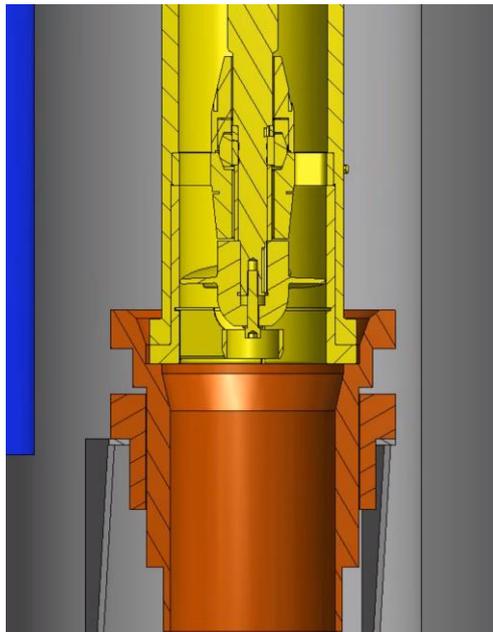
Detail of the connection between the riser outlet (orange) and pump suction (yellow)
